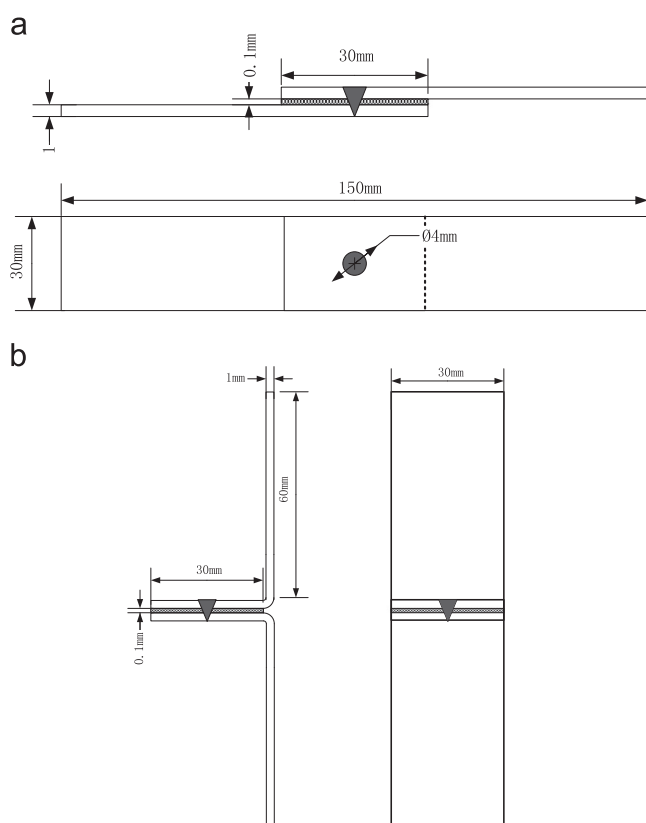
Geometry and dimension (mm) of the test specimens. (a) Tensile-shear test. (b) Peel test.
